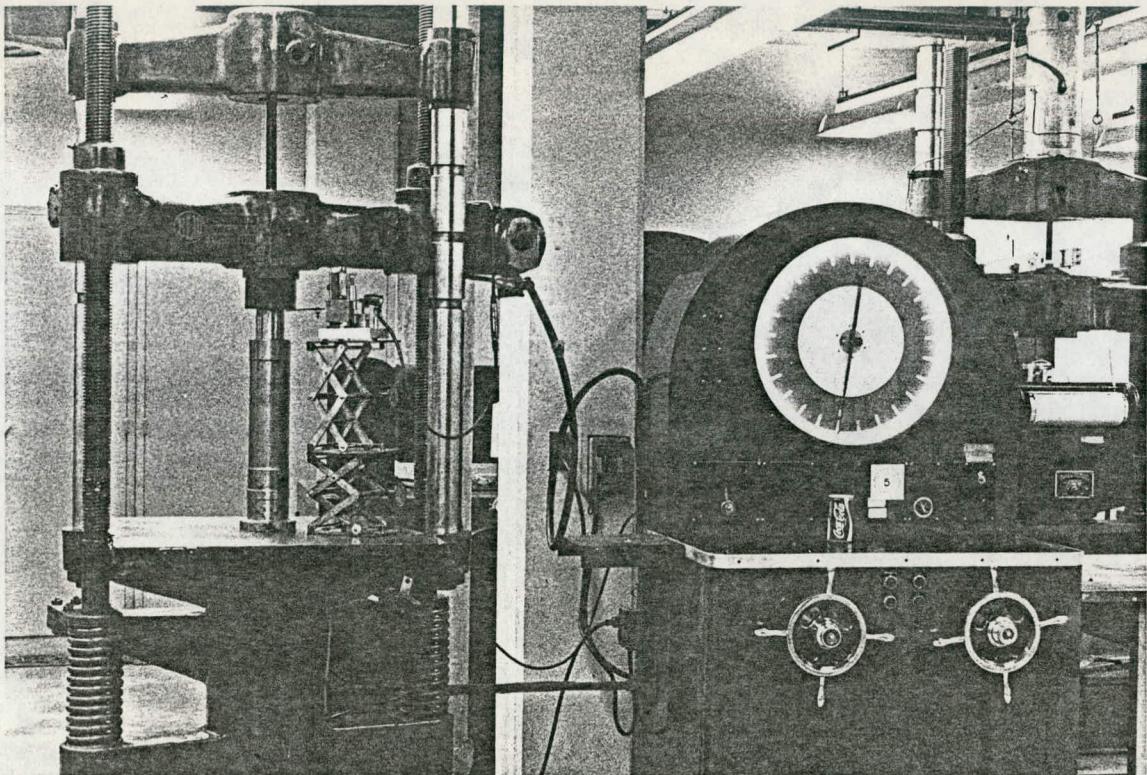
OVERALL VIEW OF THE EQUIPMENT USED FOR HYDROSTATIC EXTRUSION.
